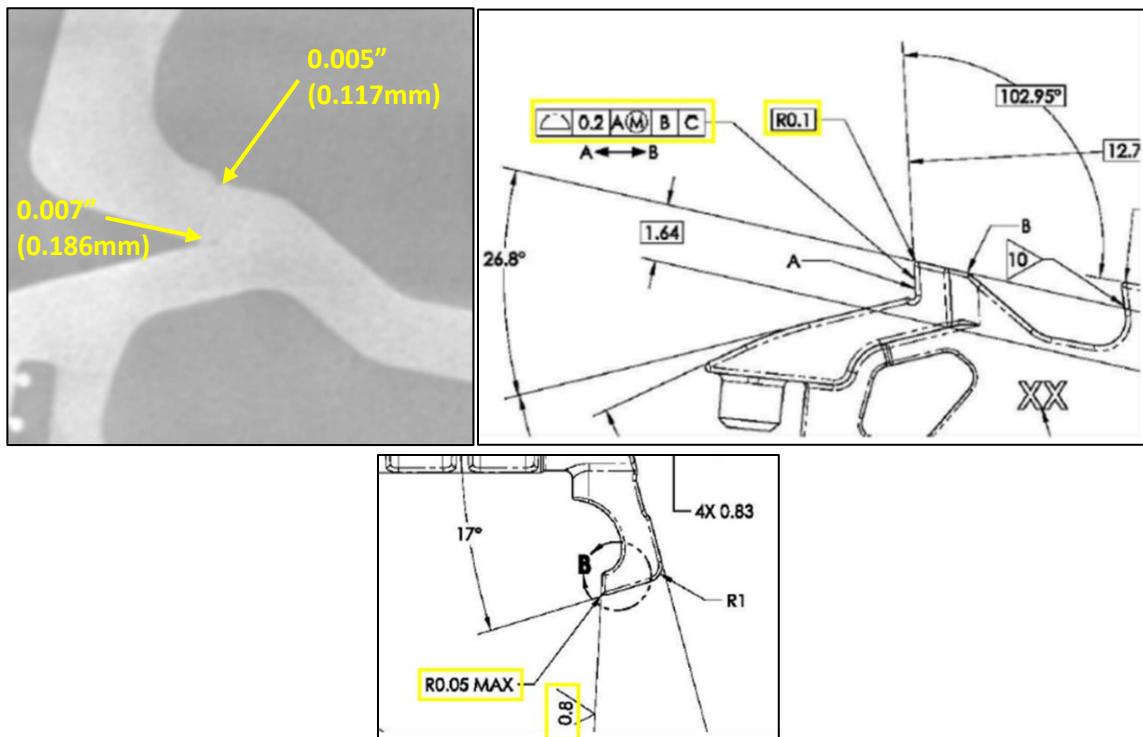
CT scan of the subject striker and sear (top left), sear drawing (top right), and striker drawing (bottom)
